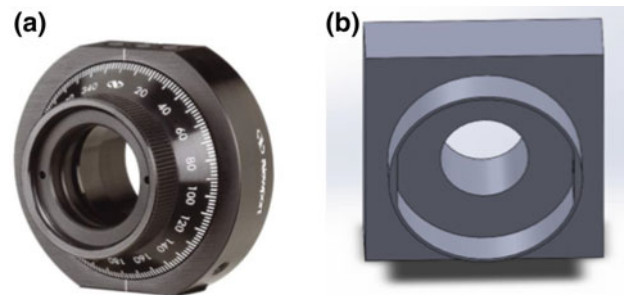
a RM25A polarizer rotation mount, b fixed polarizer holder
